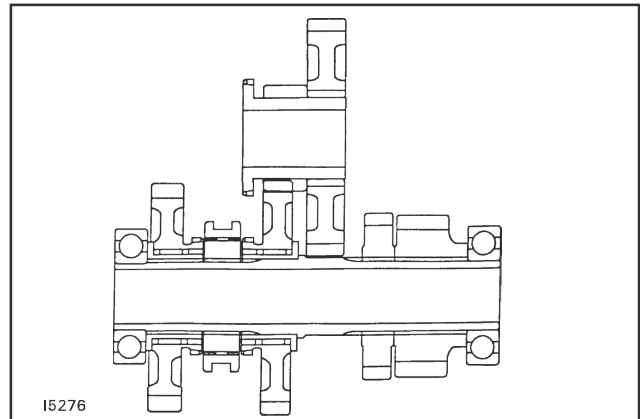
A-53: Remove the snap ring from the end of the pinion gear shaft, and remove hub.
